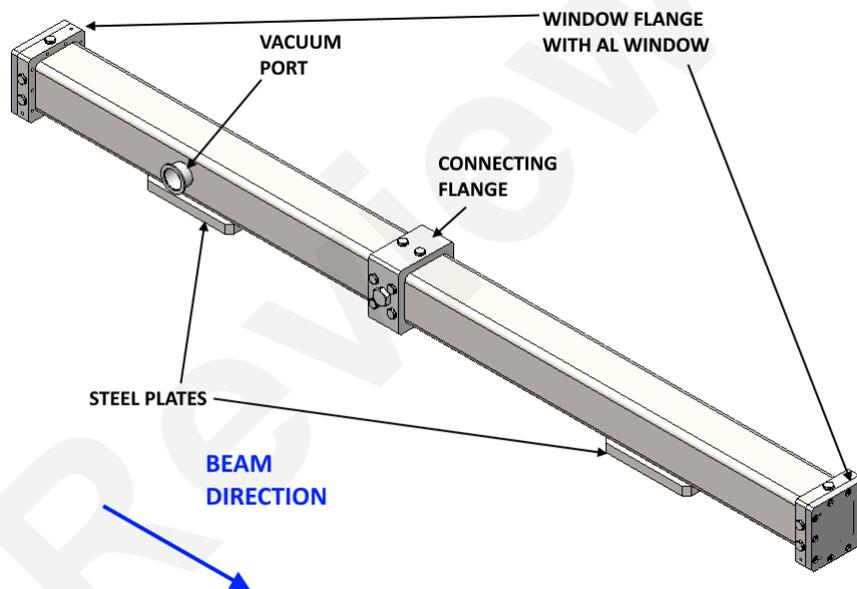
Vacuum housing for the W20-20-01 section of the neutron guide.
